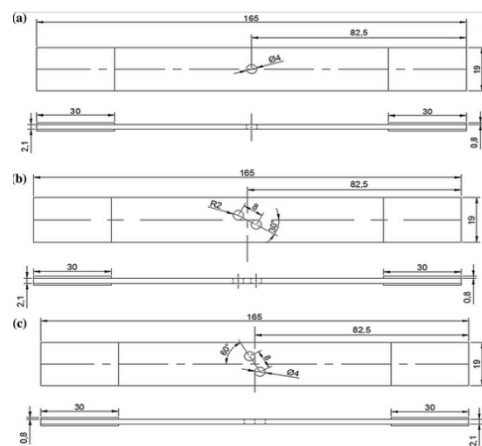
Geometries of a CN, b IN30 and c IN60 specimens for tensile and fatigue tests
